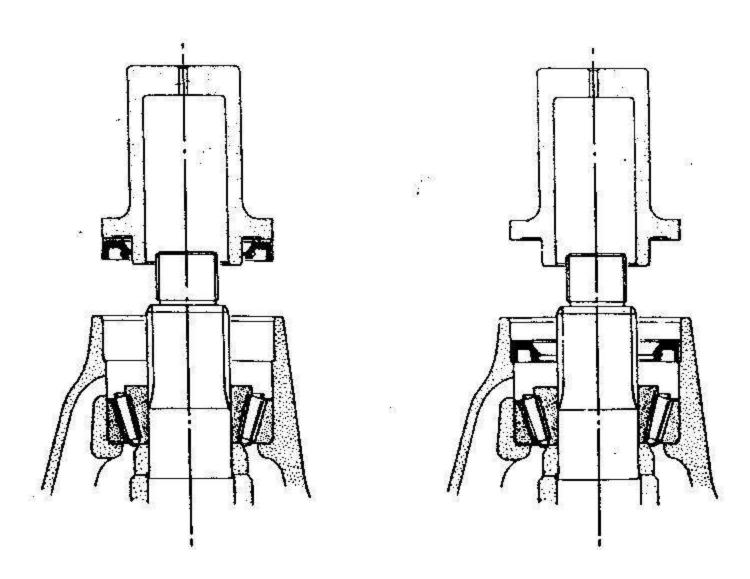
SEAL FITTING INTO GEAR CARRIER
